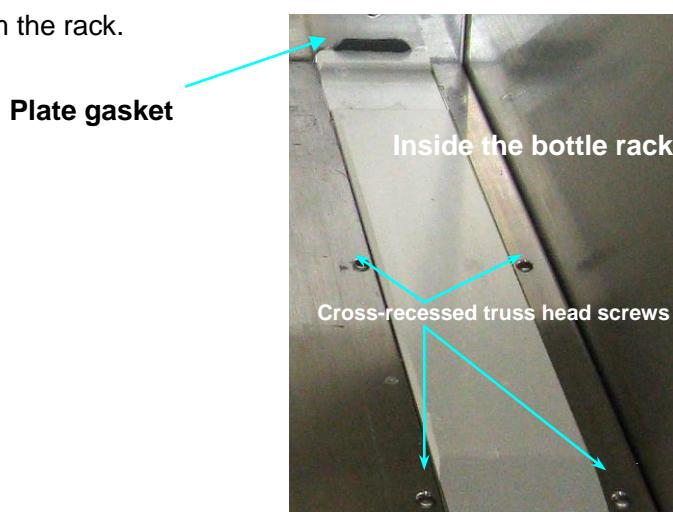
Removal of xylene heat plate unit (2)
